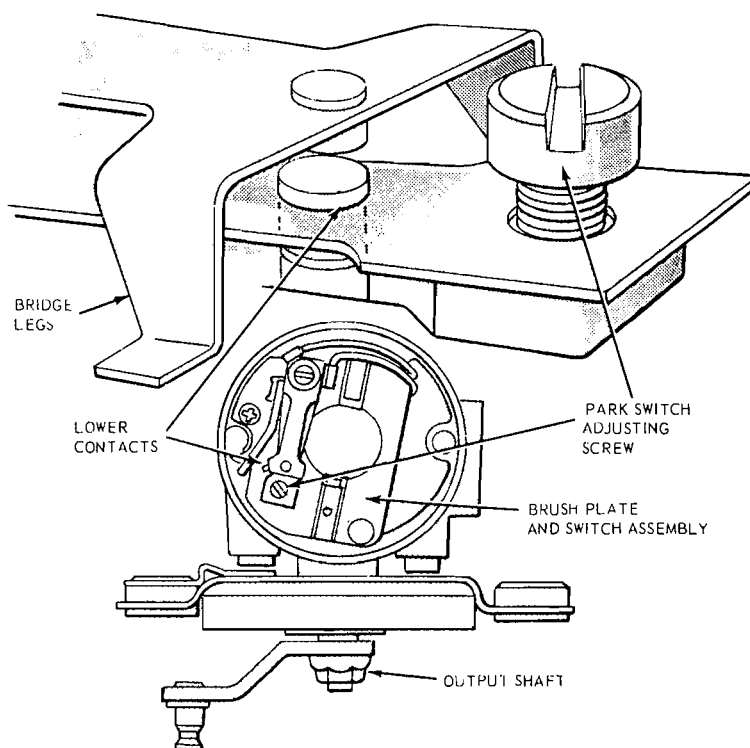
Windshield Wiper Motor Park Switch Adjustment
